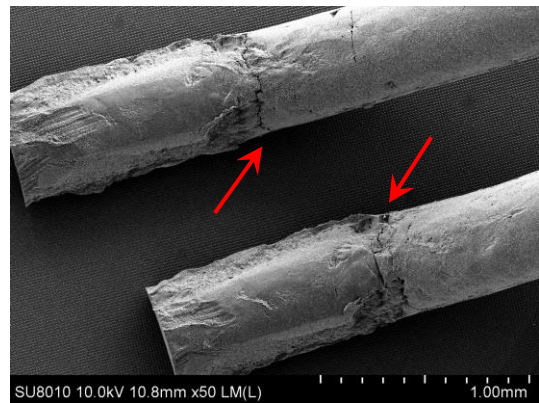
SEM image of heel crack in bond wire (DUT 3)
